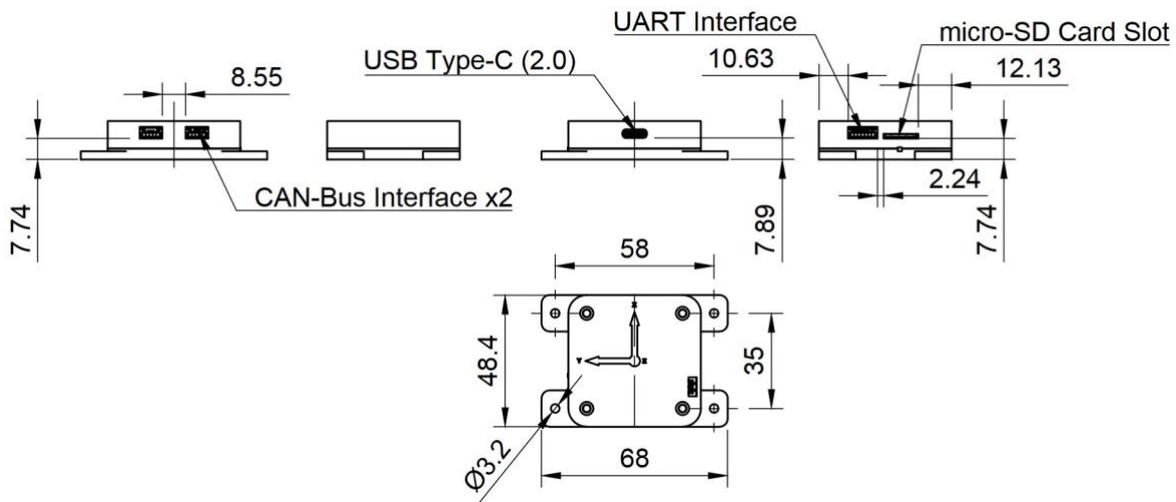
AHRS Dimension and Interfaces (MD-0001)
